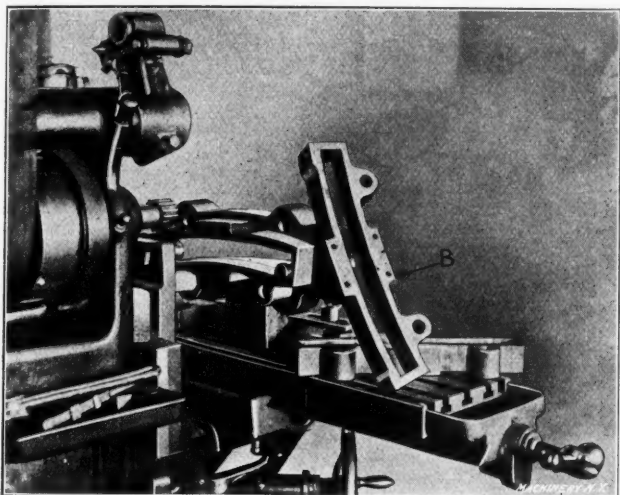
Drilling Jig shown in Fig. 6, set up and in Operation
